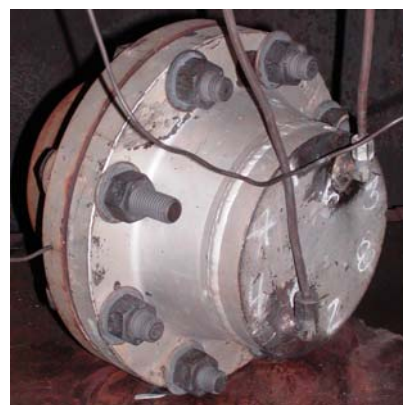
A set of 6 in class 150 cast steel fixture made from two RF weld neck flanges.
